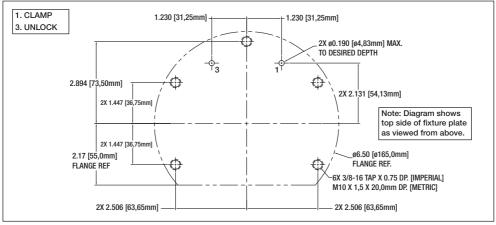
, Mounting Dimensions, Models MPFS-450V, WPFS-450V
